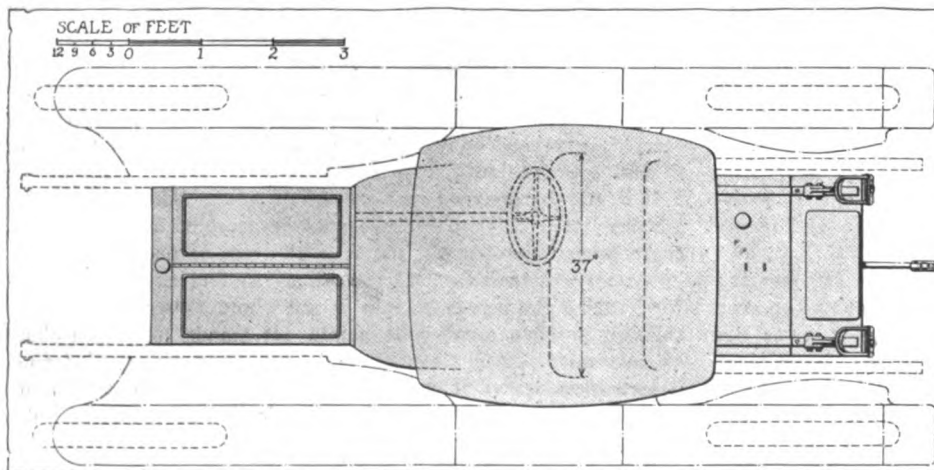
Plan view of suggested E.M.F. hansom type coupé
